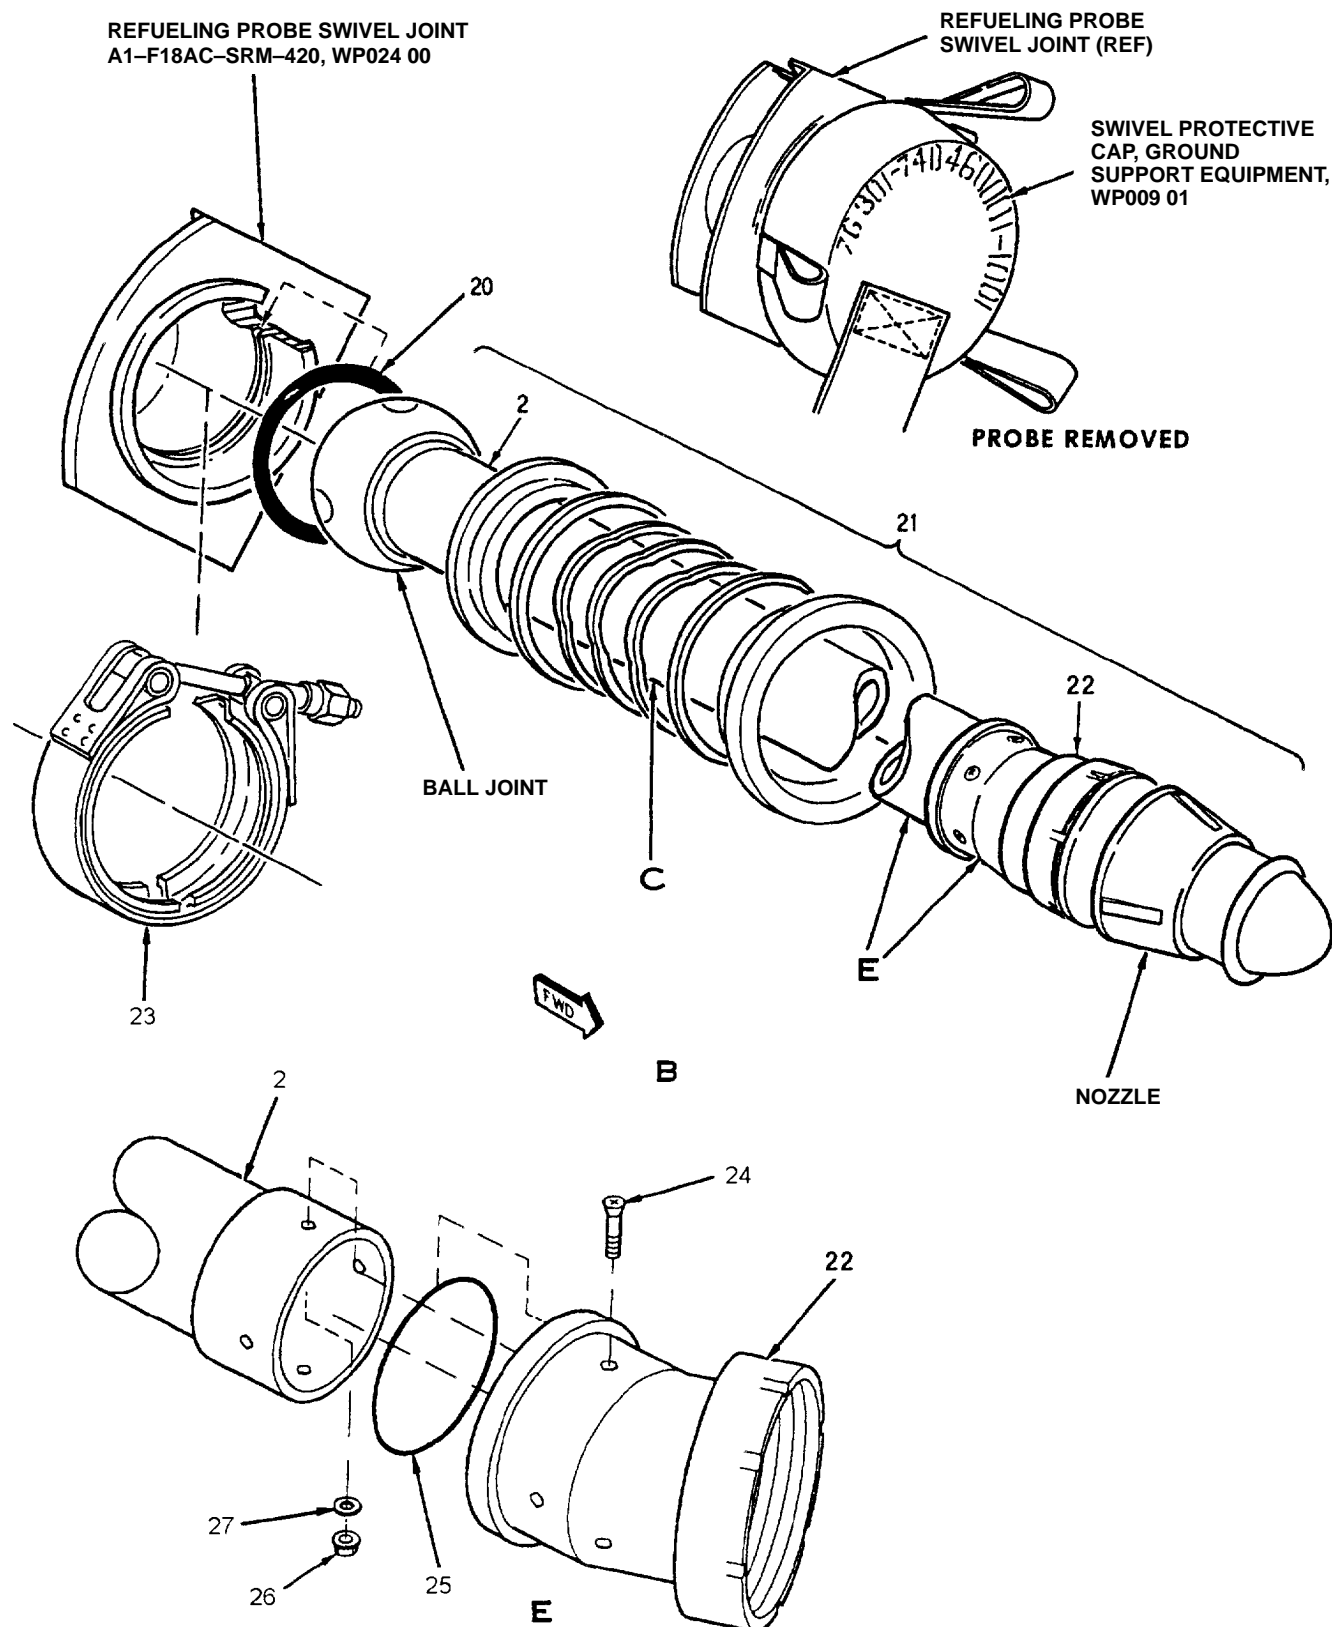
Inflight Refueling Probe Assembly (5MPB547) (Sheet 5)
